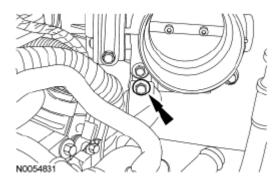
Locating Upper Intake Manifold Support Bracket Bolt Courtesy of FORD MOTOR CO.
